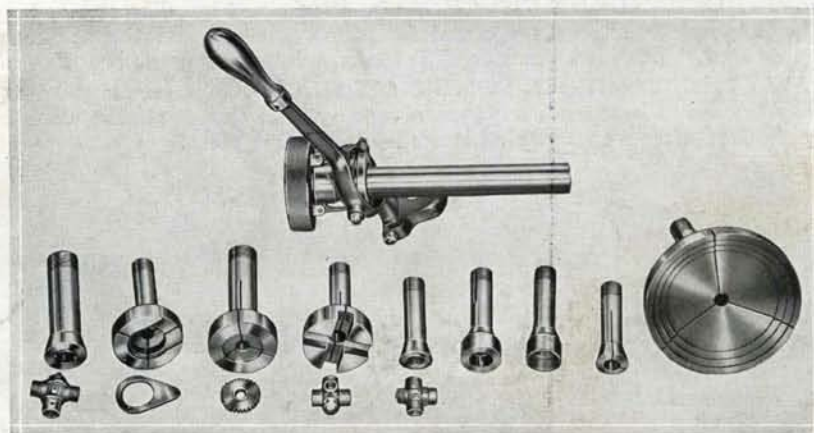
Lever Chuck Closer with Special Collets and Step Chucks
